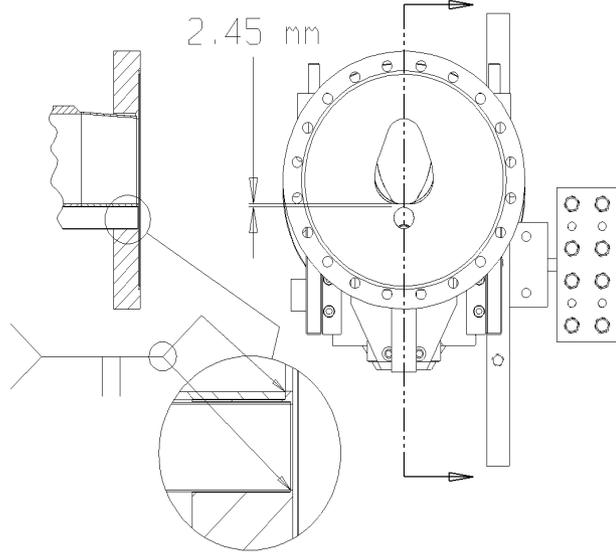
Original method for welding the storage ring thin injection septum tubes.
